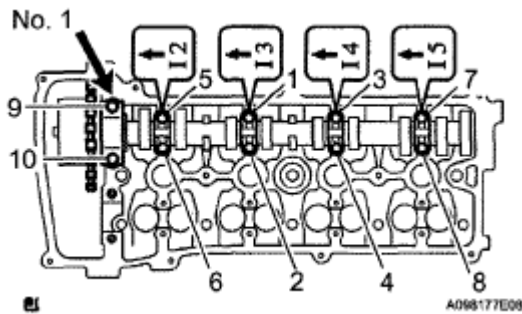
Identifying Bearing Cap Bolts Tightening Sequence
